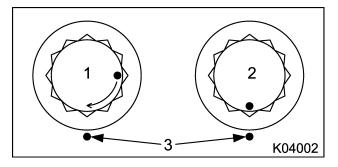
M11 Connecting rod bolt torque-to-yield markings
